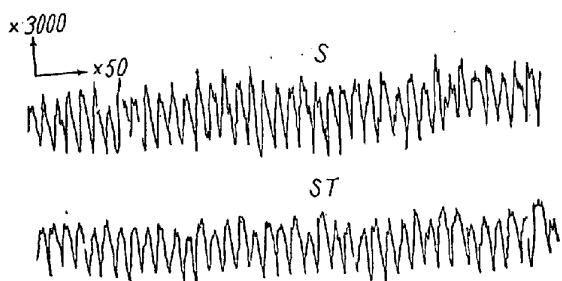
Machined surface curves in cold drawn 18-8 stainless steels.
